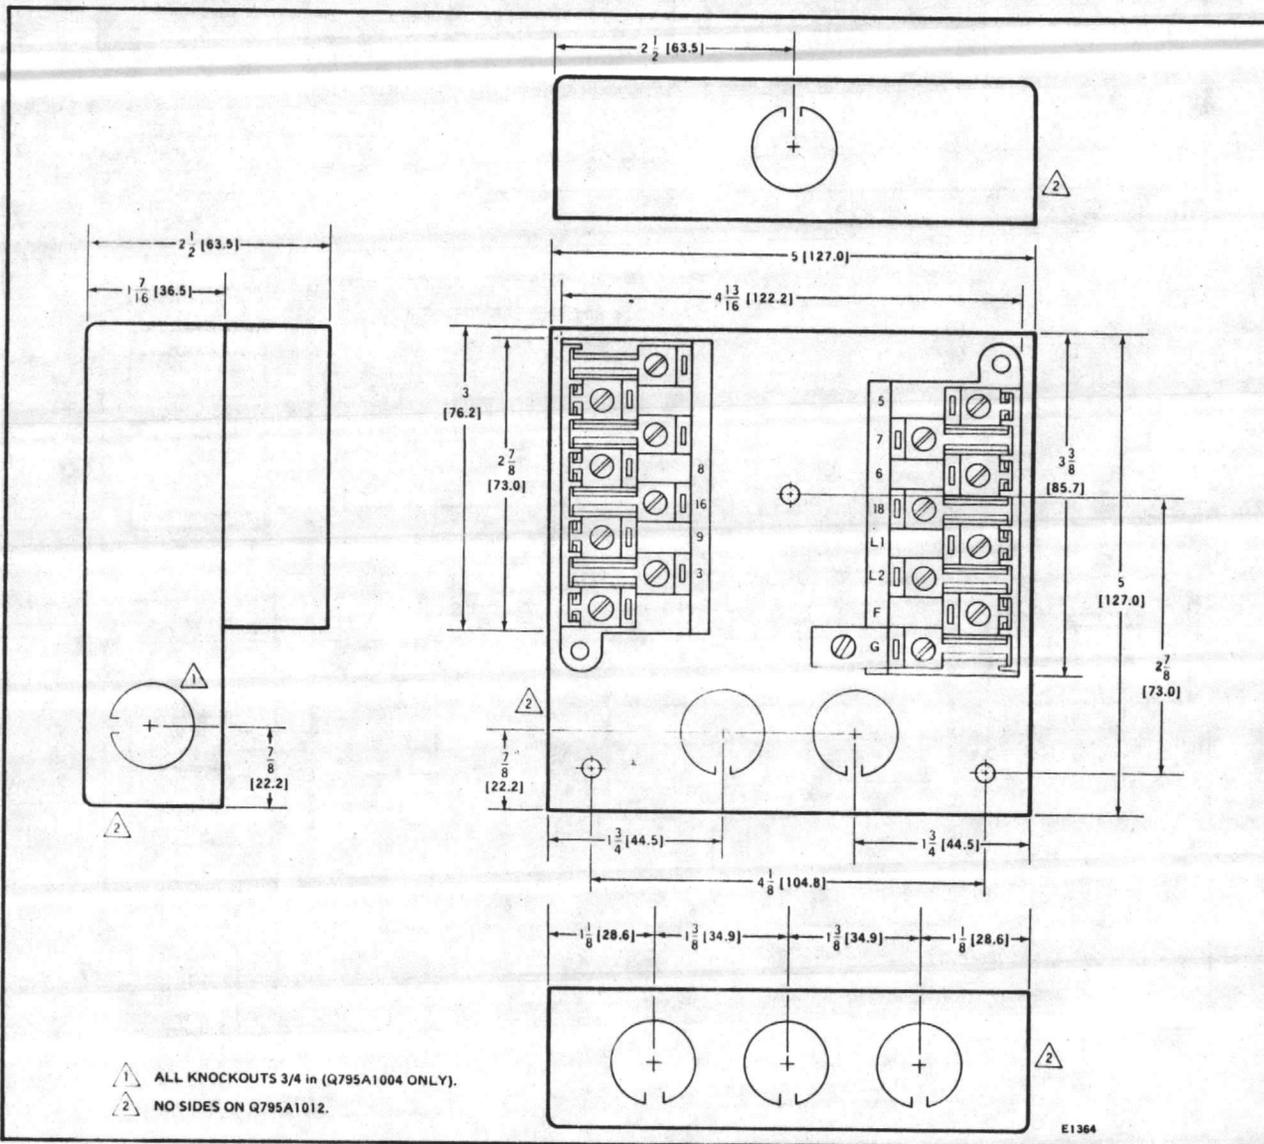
MOUNTING DIMENSIONS OF THE Q795A SUBBASE ARE SHOWN IN in. [mm ARE SHOWN IN BRACKETS].
